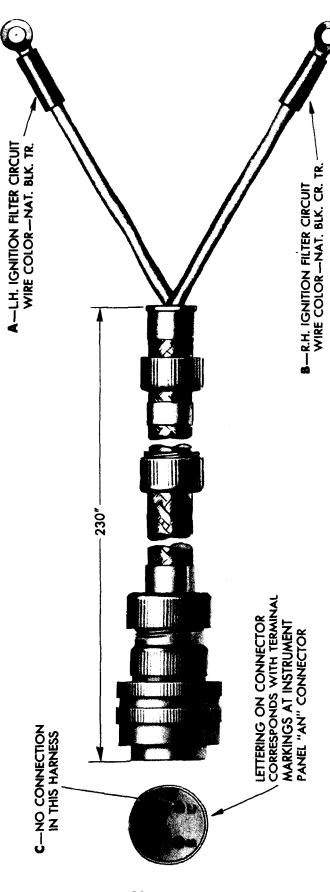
Instrument Panel to Ignition Filter Box Wiring Harness
